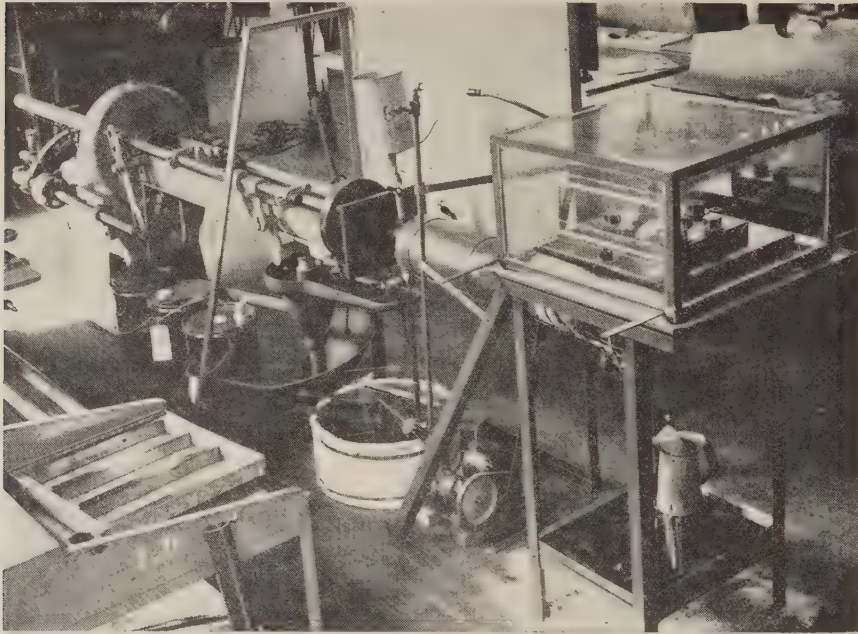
EQUIPMENT FOR EXPERIMENTAL HYDRAULIC BULGING
